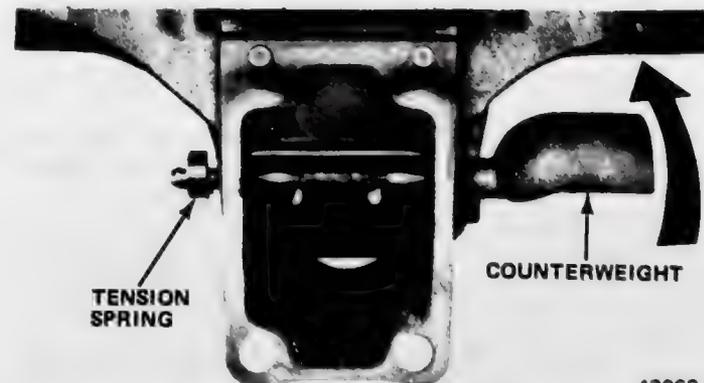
K-10 Heat Valve in Heat OFF Position—Six-Cylinder
